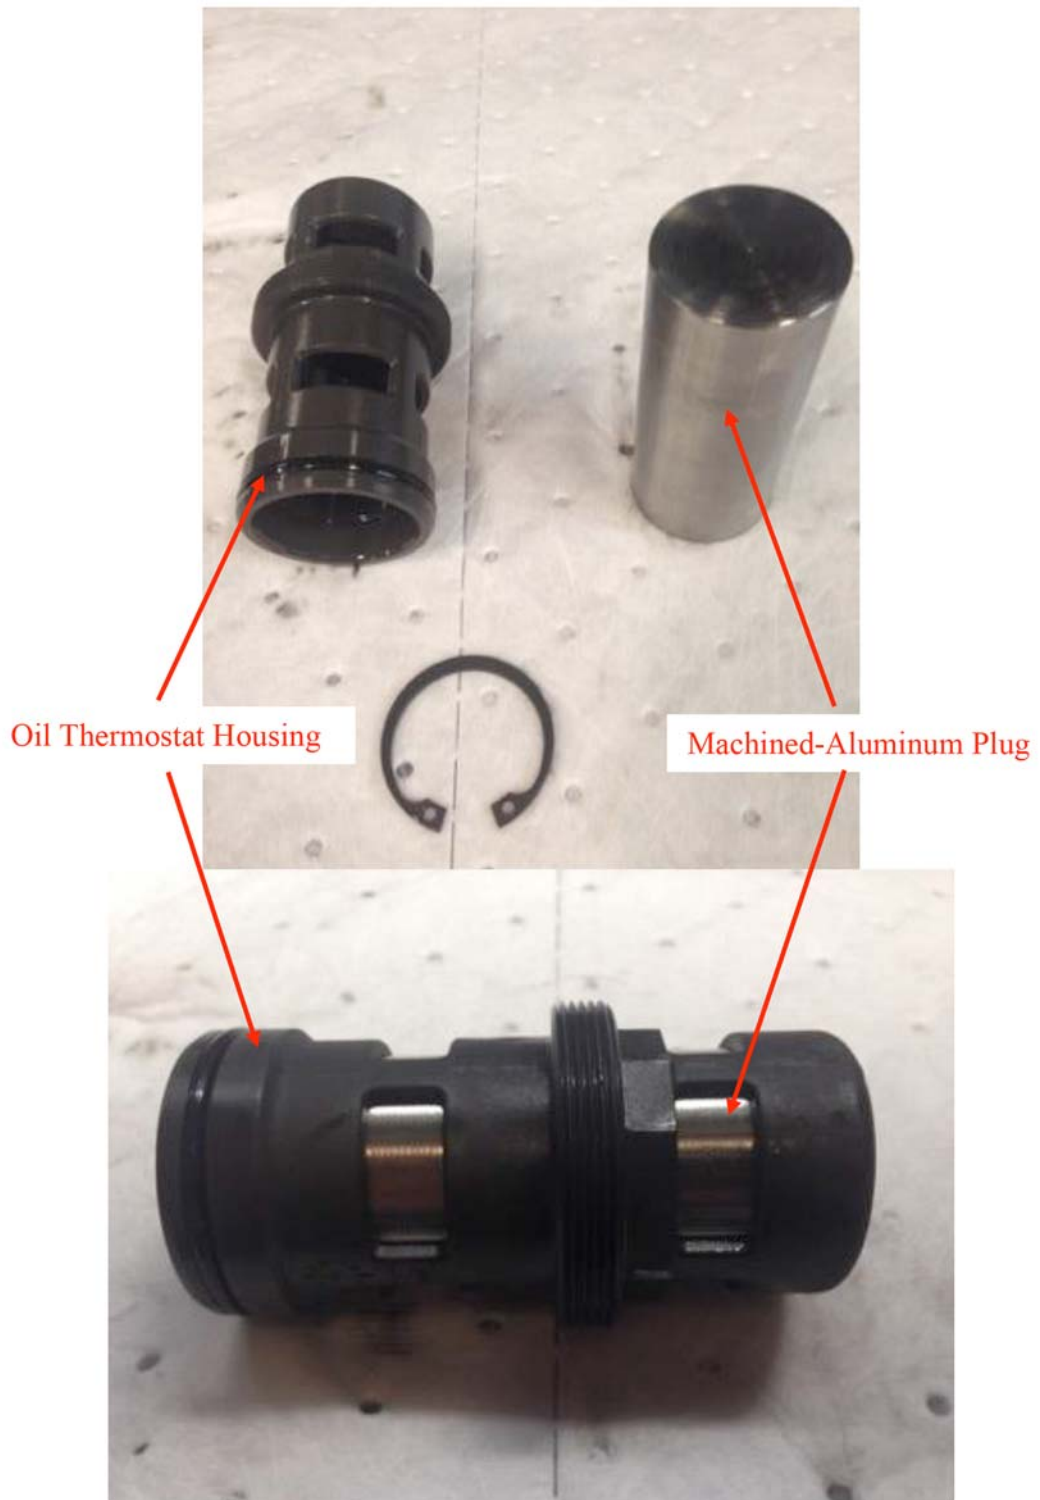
Oil Thermostat Housing and Machined-Aluminum Plug
